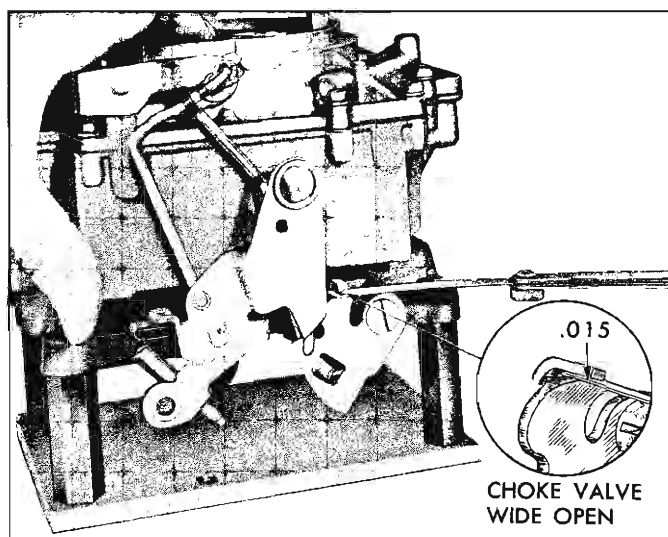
Checking Secondary Throttle Contour Clearance Adjustment
